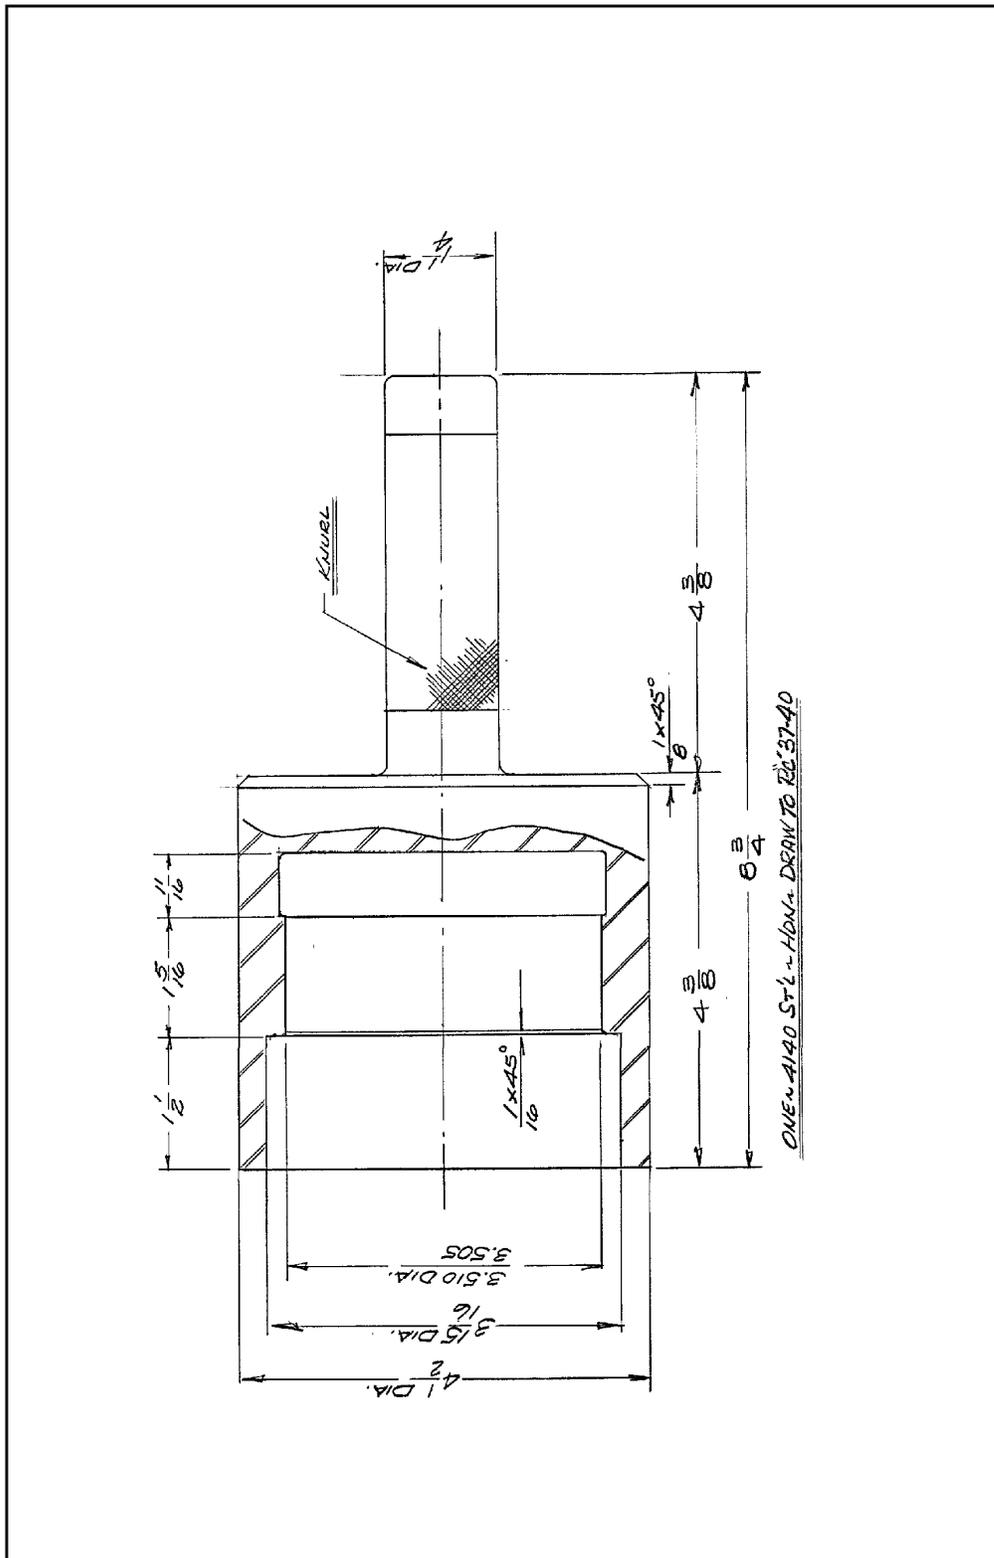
Assembly Tools - Bearing Cone Pressing - "A" Bearing
